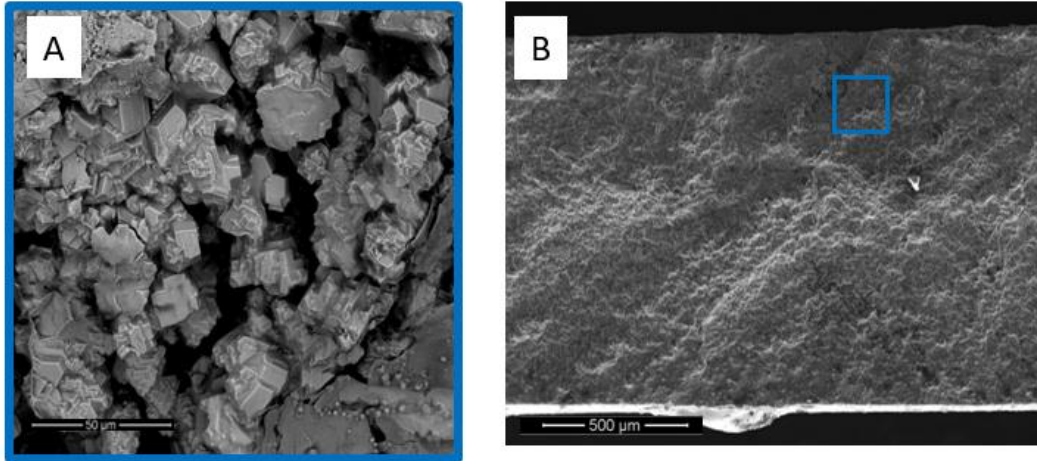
(A) Detailed fracture surface of GI coated QP1180 steel hot tensile tested at 800°C (B) Overall fracture surface
